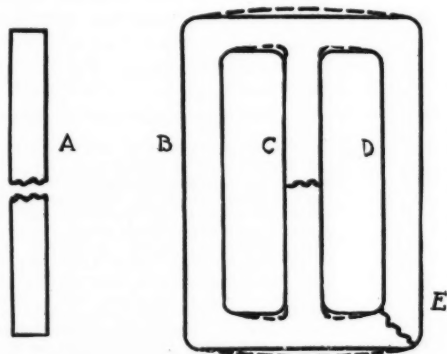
Expansion and contraction must be taken into consideration when welding C, while A is free to expand
